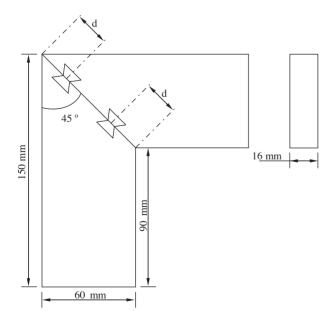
Configuration and dimensions of the corner joints used in the study. d = distance (mm) between the dovetail holes and the edges of the joints.
